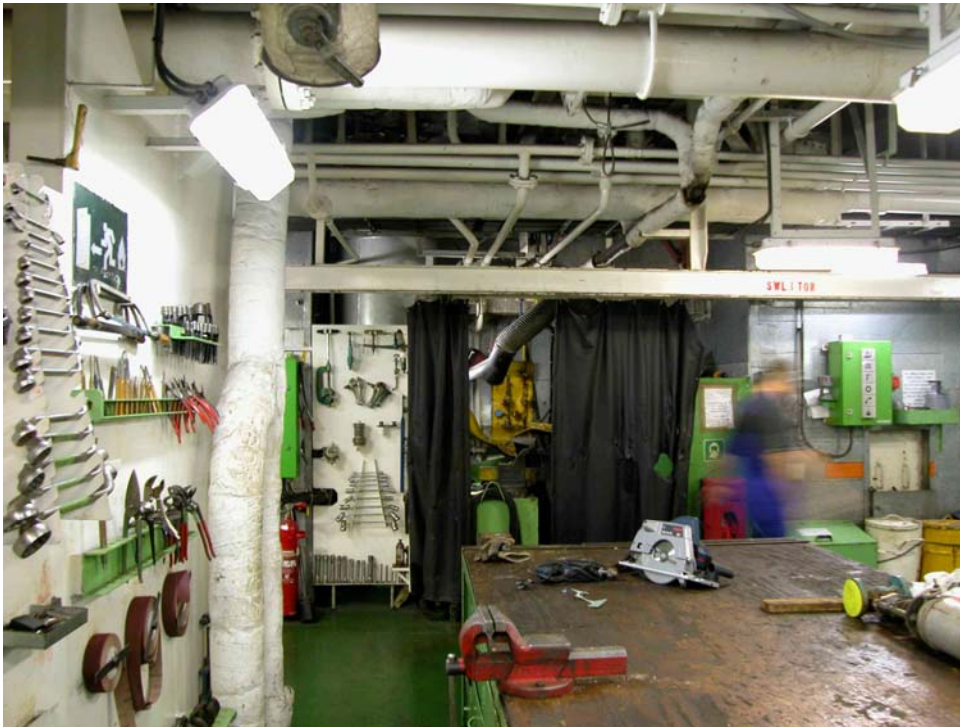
Welding workplace separated by curtain (view 1)
